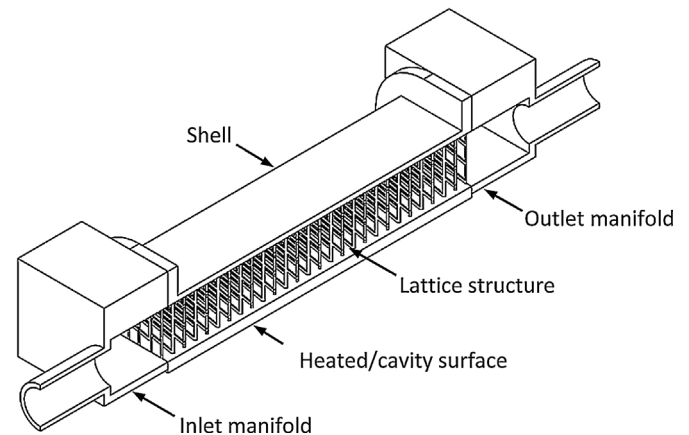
Sectioned thermal transfer test piece showing internal lattice structure.
